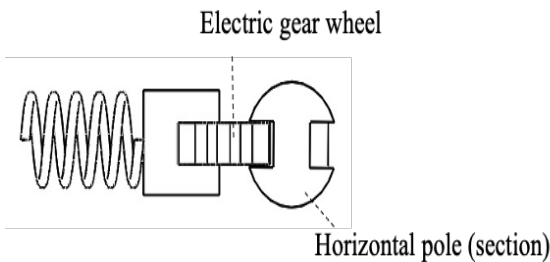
Electric gear and gear rack in longitudinal pole (side view)
